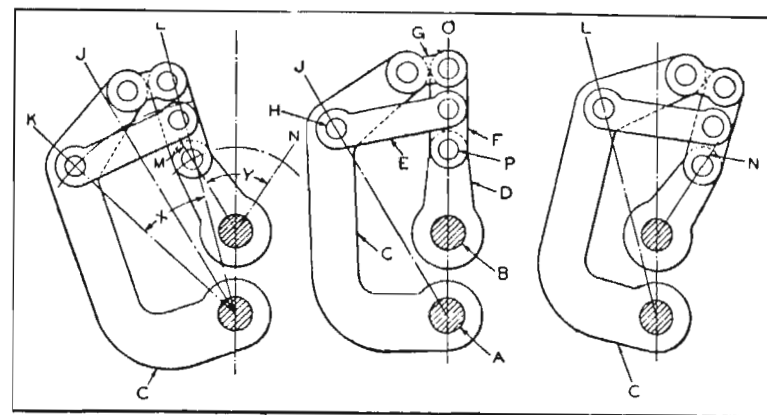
Mechanism for Transmitting an Oscillating Movement from Shaft A to Shaft B, the Latter Shaft being Oscillated through a Larger Angle than Shaft A.
